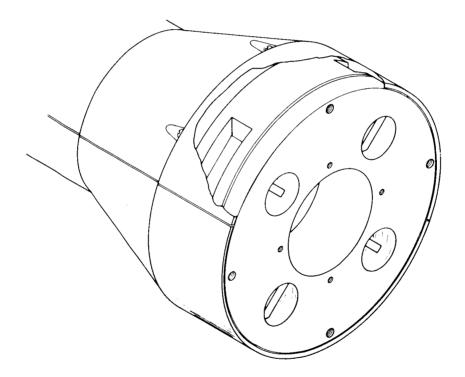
Smart Hand Wrist Force-Torque Sensor and Electronics Bay
